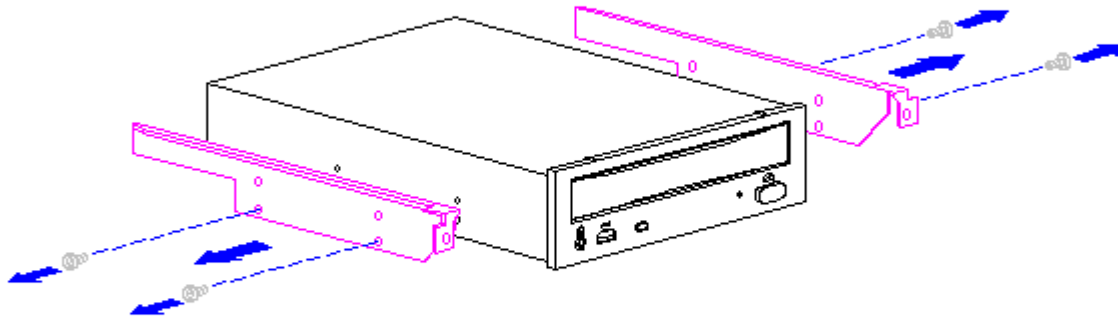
Removing the Mounting Brackets from the CD-ROM Drive
